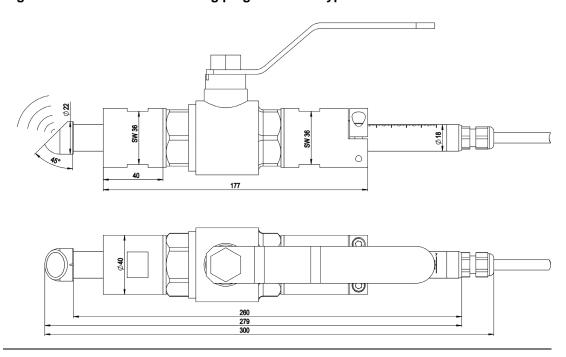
Dimensioned drawing pipe sensor Type NIS-V200RL
